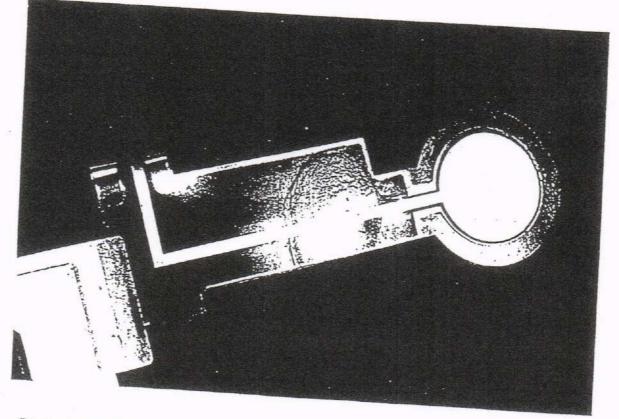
Hookswitch part of the flexible circuit layer showing residue on both
